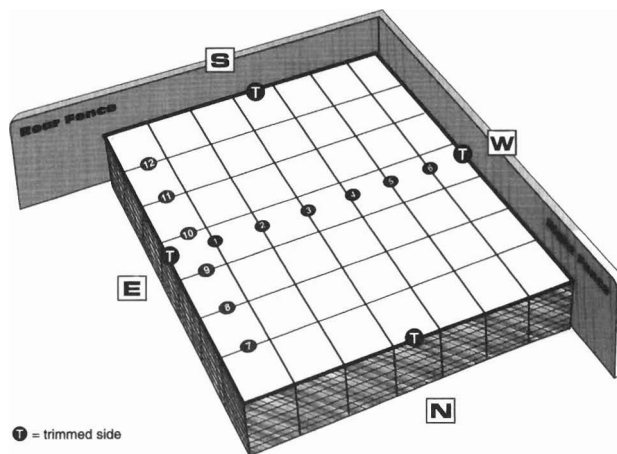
After the operator rotates the cutting load one-quarter turn to the right, the machine advances the rear fence forward the proper distance to make cuts 7, 8, 9, 10, 11 and 12.
